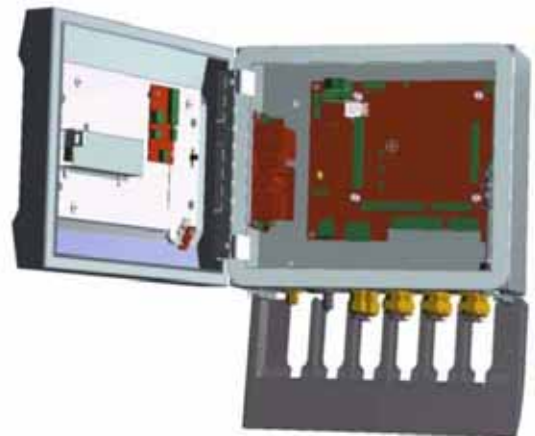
Cable Protection Shield Lowered and Front Door Open
